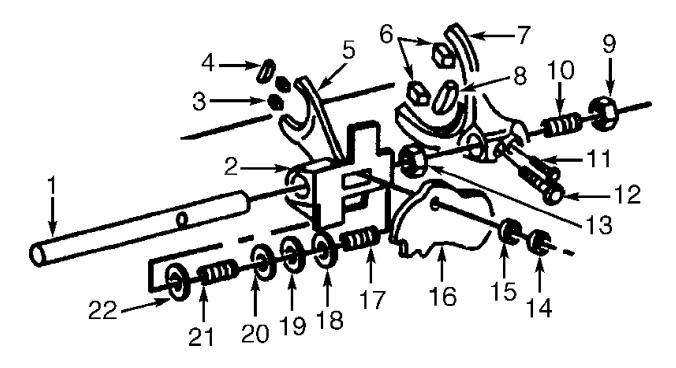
Exploded View Of Transfer Case (Model 241 Shown; Model 243 Similar)
